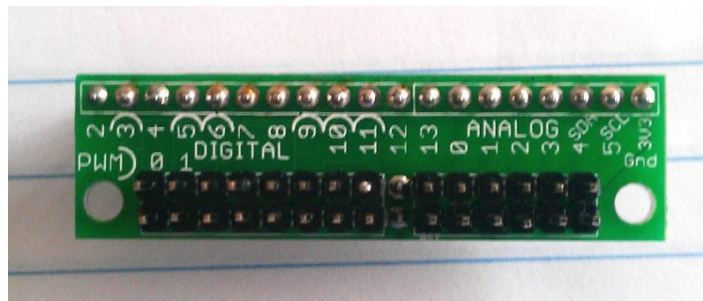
Solder the 19 pins for the breadboard, all facing down.
